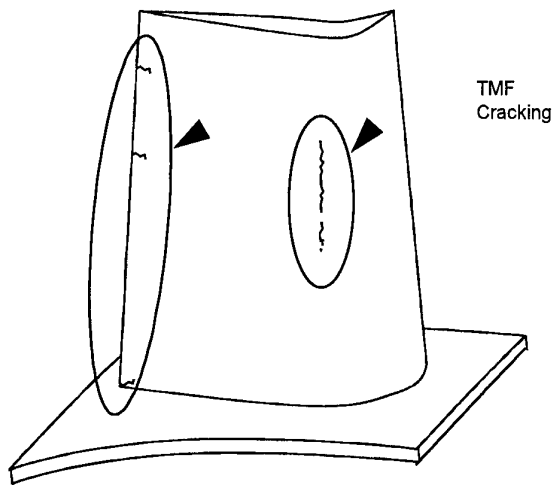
TMF cracking observed on anisotropic turbine blades can occur parallel and perpendicular to the casting solidification direction.
